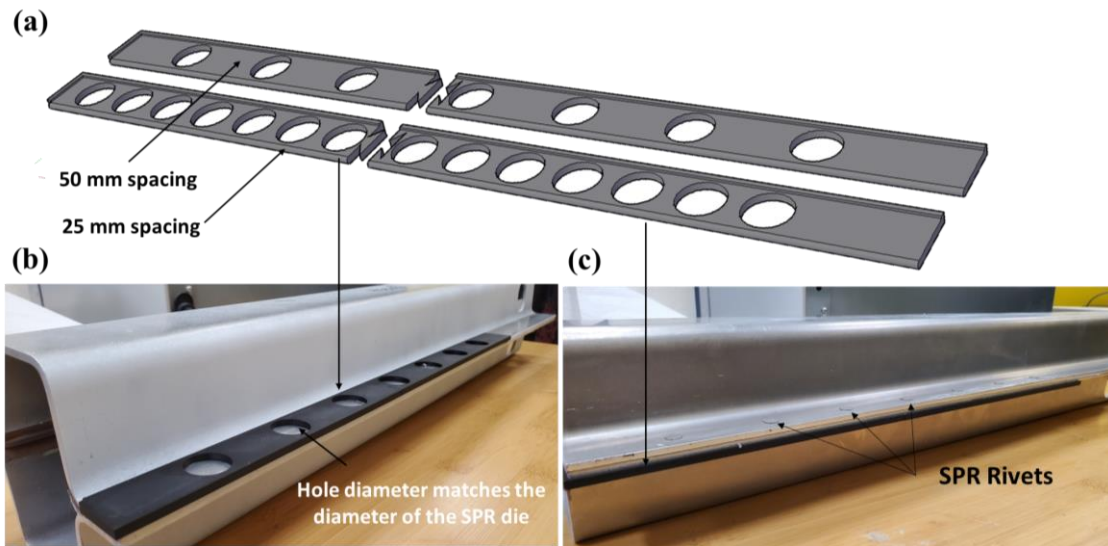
(a) SPR riveting templates for 25 mm and 50 mm spacing (designed as 2-part assembly due to the 3D printer size limitation), (b) SPR template applied to a flange, and (c) SPR rivets applied using the 3D template for positioning.
